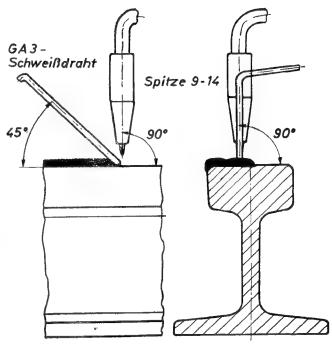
Position of torch and wire when executing built-up welding on rails
